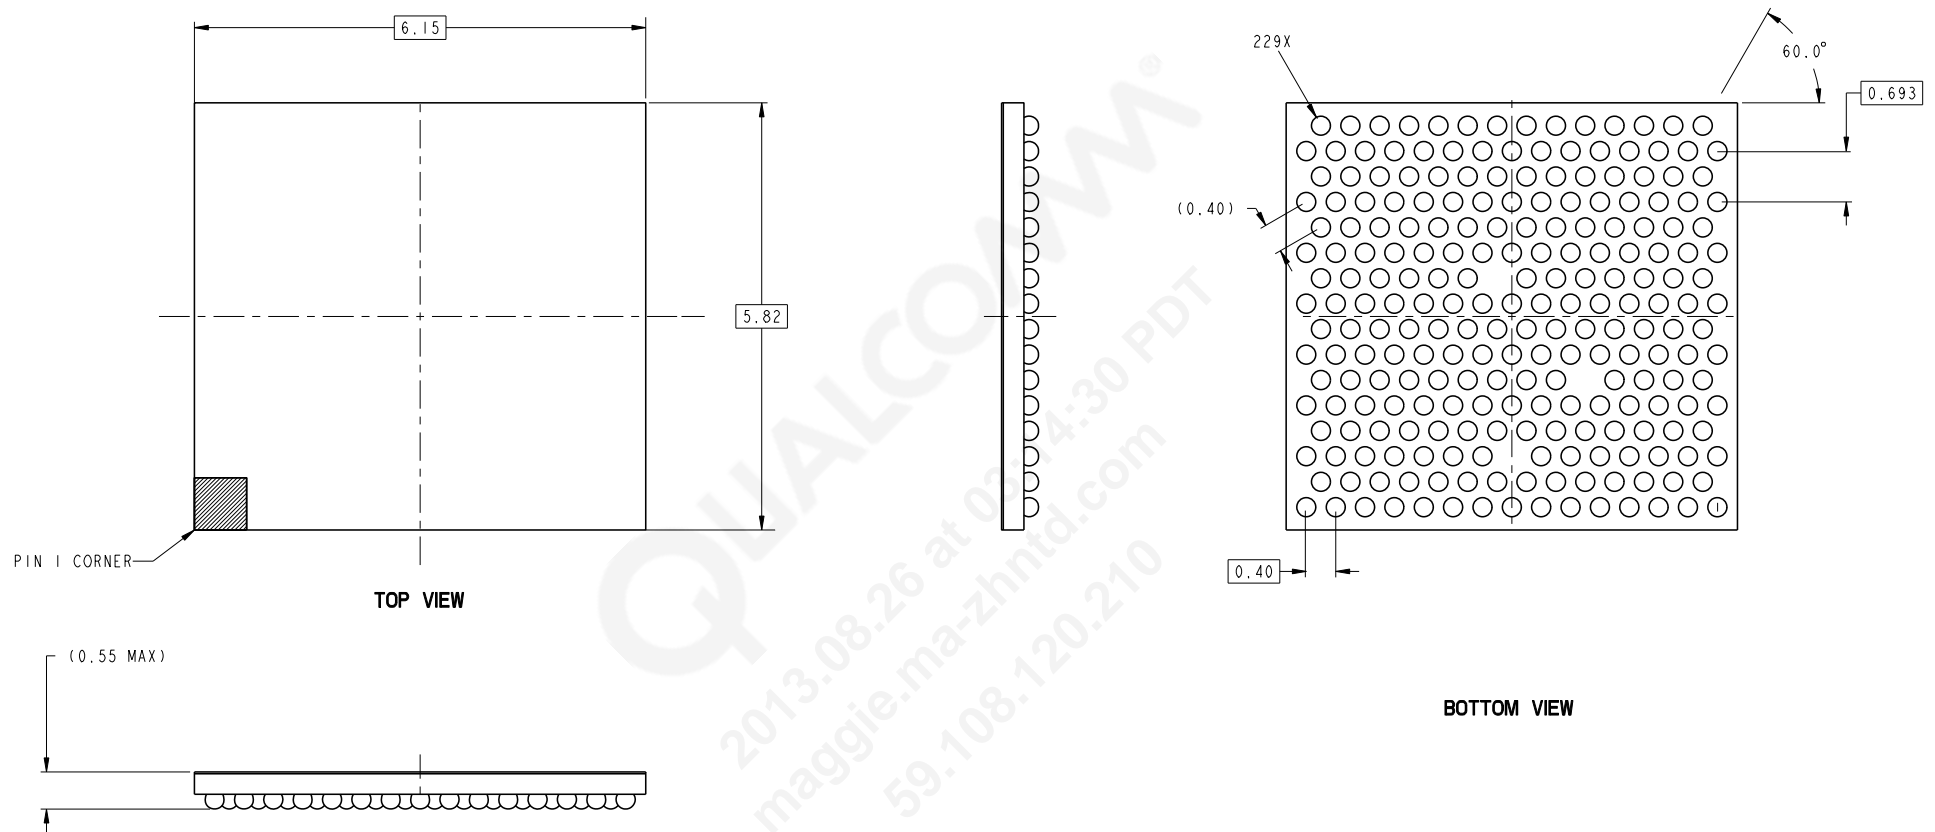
229 WLNSP (5.82 × 6.15 × 0.55 mm) package outline drawing
